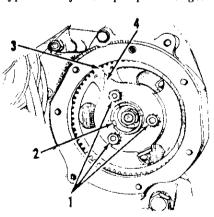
Injection pump drive gear used on early B-275 tractors equipped with injection pump having pneumatic governor.
